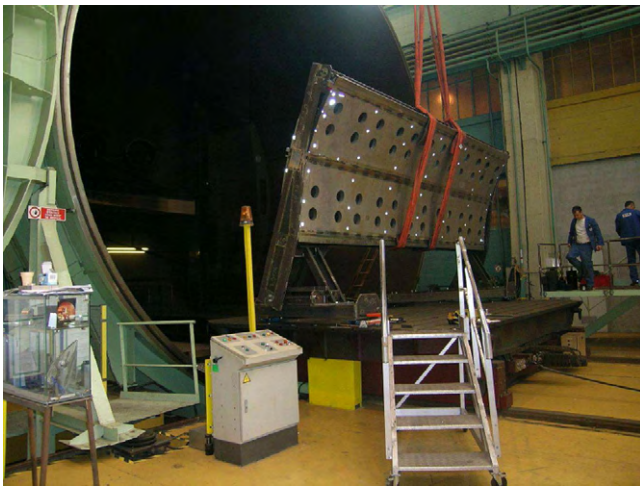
VATS in the vacuum chamber of DCNS before welding.
